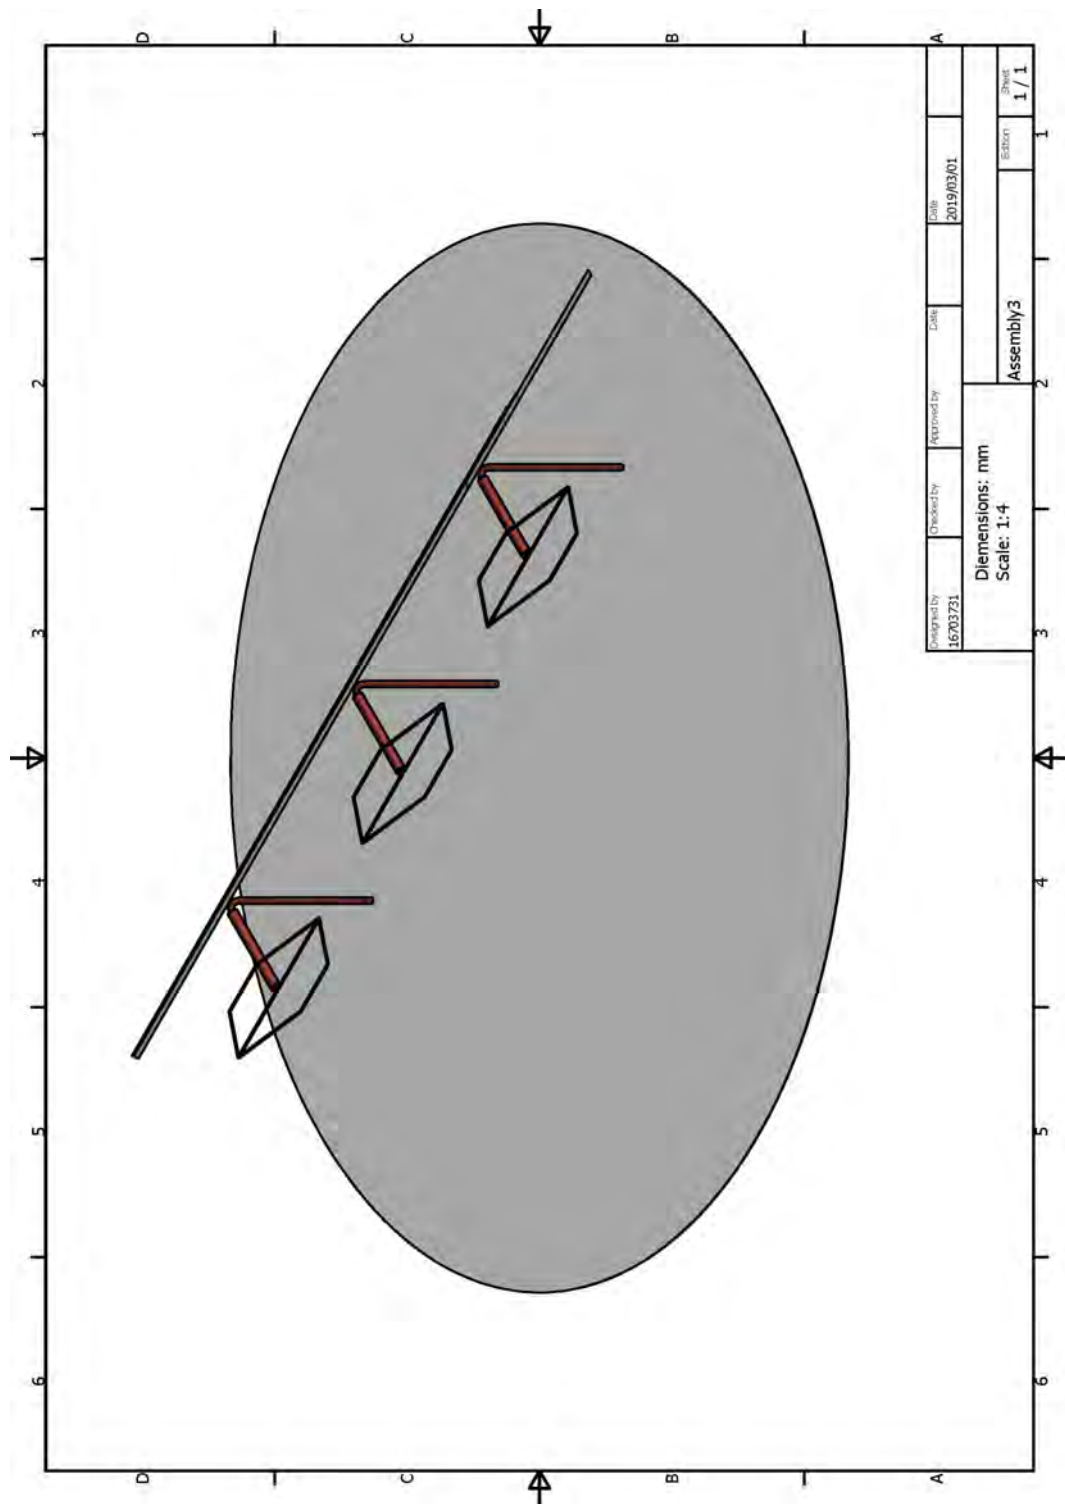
1:100 scale three element model assembly drawing. This engineering drawing shows the completed construction of the 1:100 scale three element model.
